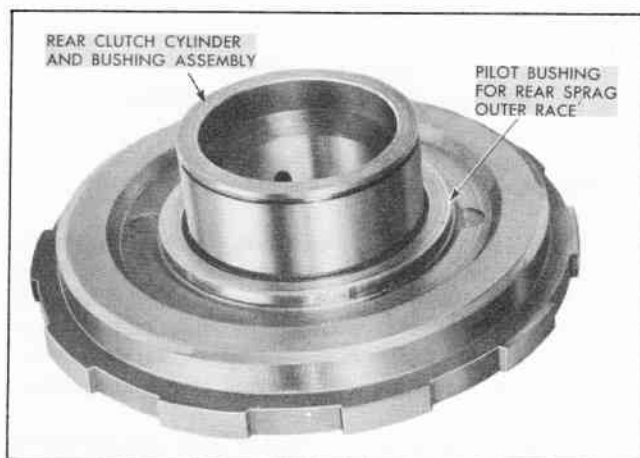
Rear Clutch Cylinder and Bushing Assembly
